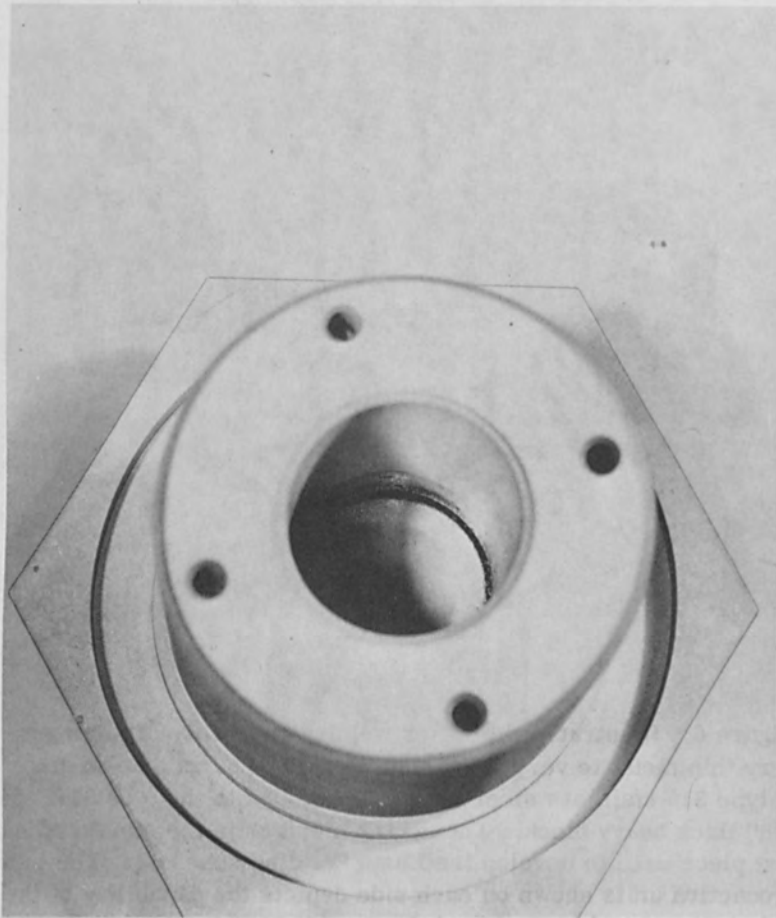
Is another heavy duty Laser weld, but with the weld much closer to the insulator material than the assembly shown in Fig. 6.
